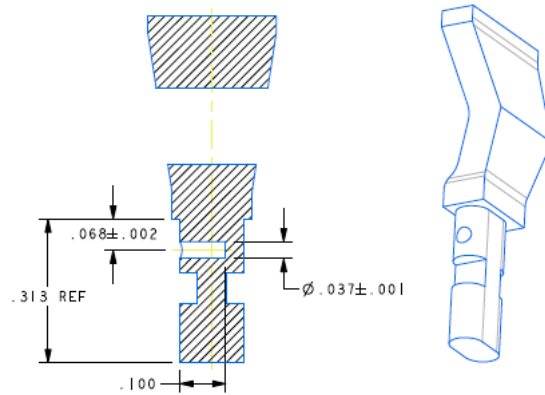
Probe head detail showing wiring hole (dimensions in inches)
